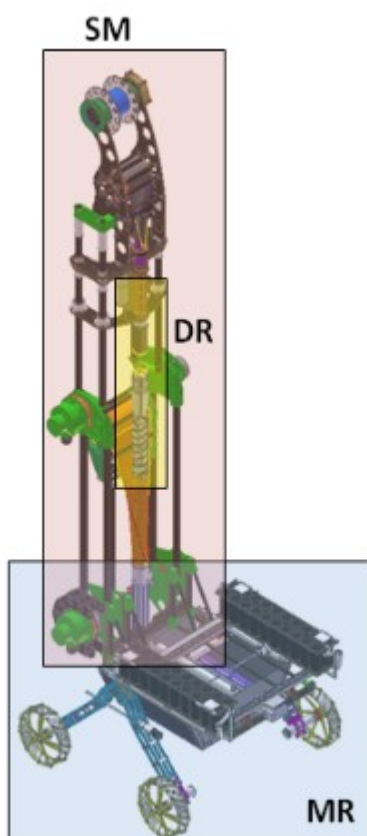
The mobile drilling system designed by CBK PAN and AGH University of Technology. MR – mobile robot, SM – support module, DR – drill head.
